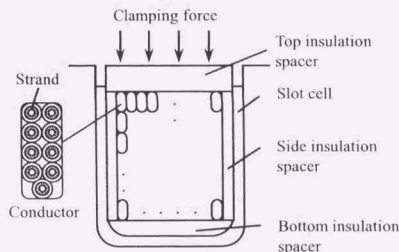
Cross-sectional view of the winding pack in the slot of winding shaft.
